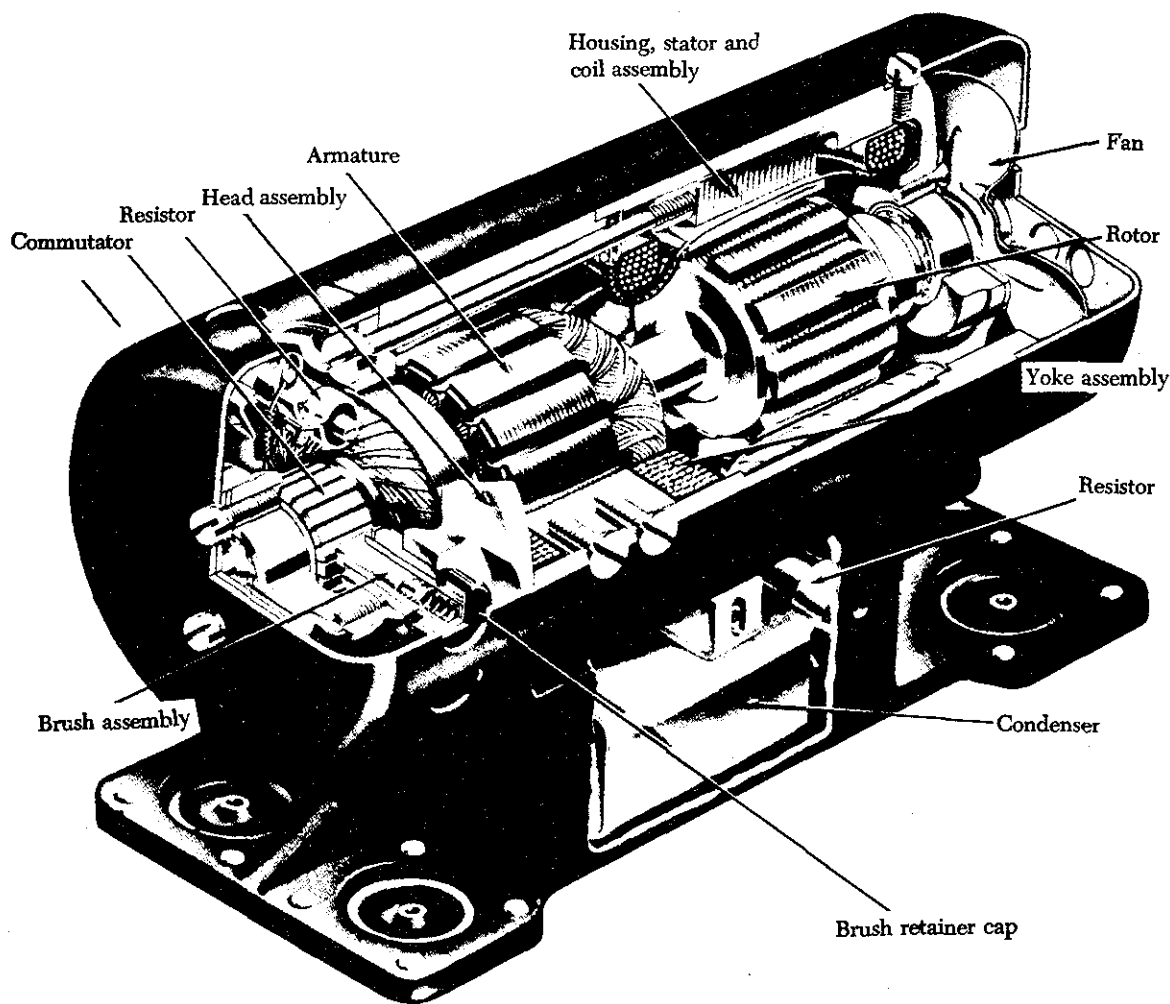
Cutaway view of inductor-type rotary inverter.
